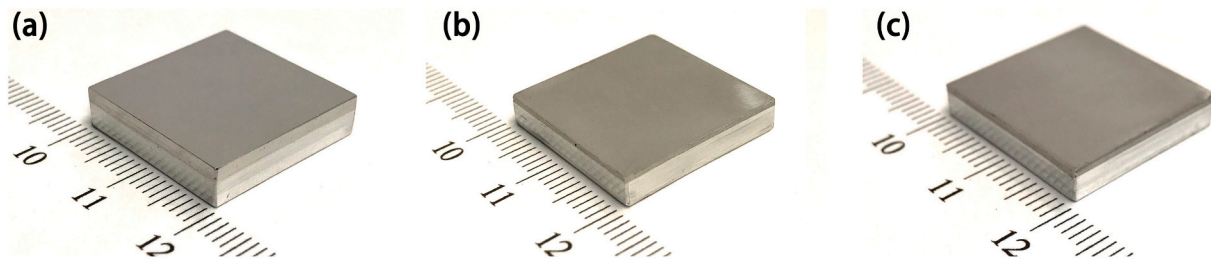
Photos of the as-deposited coatings: (a) pure FeCoNiCrMn coating (b) Composite-1 coating (c) Composite-2 coating.
